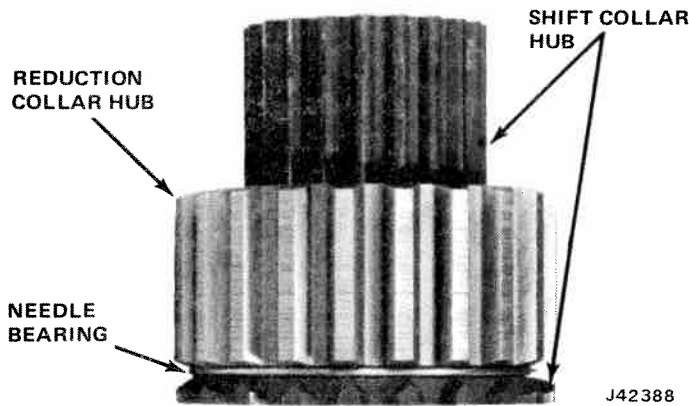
Needle Bearing and Reduction Collar Hub Assembled with Shift Collar Hub
